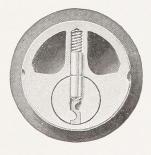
Cross-section of Cylinder Pin-tumbler raised by key to correct position
